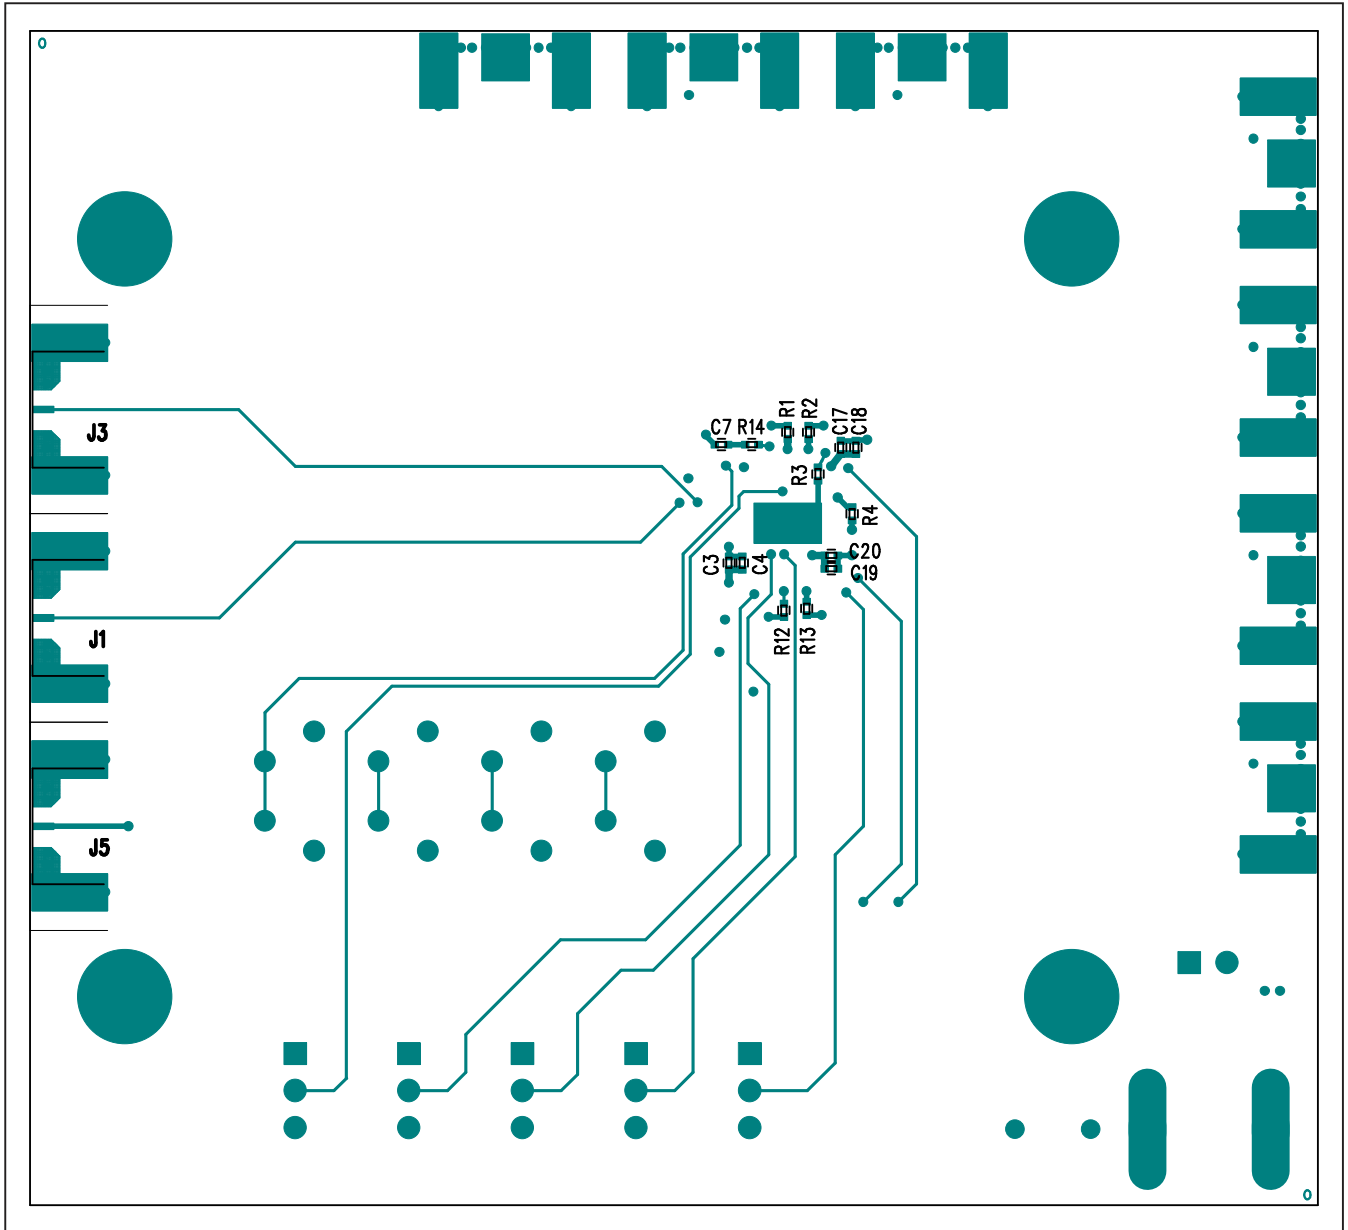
MAX3625B EV Kit Assembly Drawing—Bottom Side
